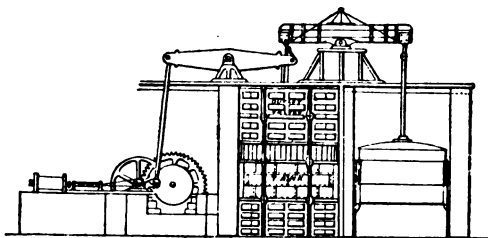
The Struve Ventilator, Ynysdavid Pit, Cwm Avon, Side Elevation (from Lupton's *Mining*).
